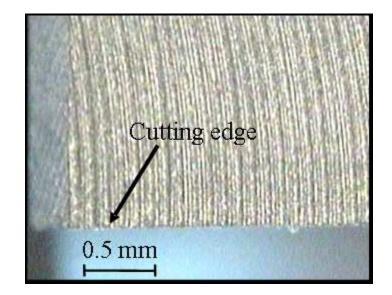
(a). Cutting edge of a fresh tool. 58x45mm (150 x 150 DPI)
